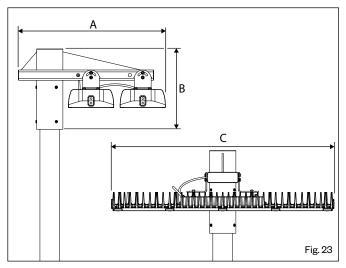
Direct Entry Mount - Overall Dimensions - See Table
